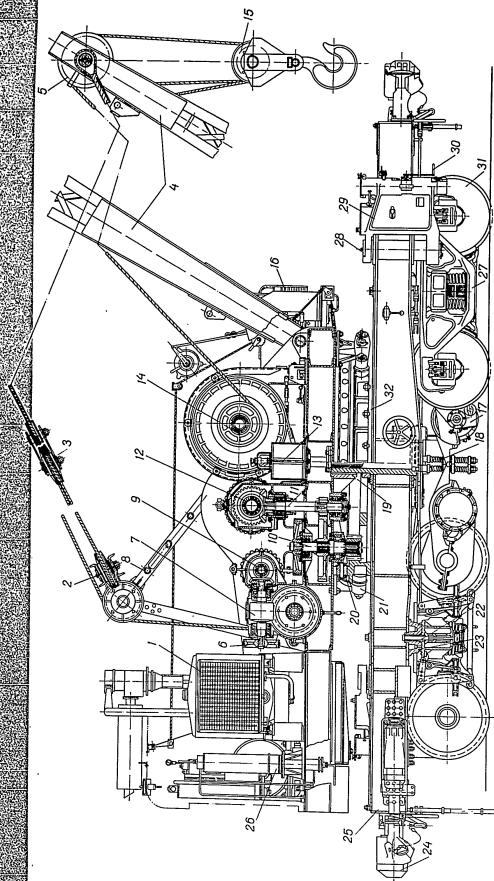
Longitudinal section and side views of the Model K-251 Crane: 1 - power equipment; 2 - boom-lifting pulley blocks of the stationary casing; 3 - movable casing pulley blocks; 4 - boom; 5 - boom head blocks; 6 - boom winch bracket; 7 - worm drive; 8 - two-legged support; 9 - transmission shaft; 10 - swinging mechanism vertical shaft; 11 - intermediate shaft; 12 - intermediate shaft; 13 - ring collector; 14 - main winch shaft; 15 - back shaft; 16 - back shaft; 17 - intermediate shaft; 18 - main winch shaft; 19 - turntable hub; 20 - rollers of supporting mechanism; 21 - pivot bolt; 22 - bogie pivot bolt; 23 - supporting sleeve; 24 - automatic coupling; 25 - running gear frame; 26 - hydraulic control receiver; 27 - bogie frame; 28 - bracket axis; 29 - outrigger bracket; 30 - jack lifting lever; 31 - hydraulic jack
